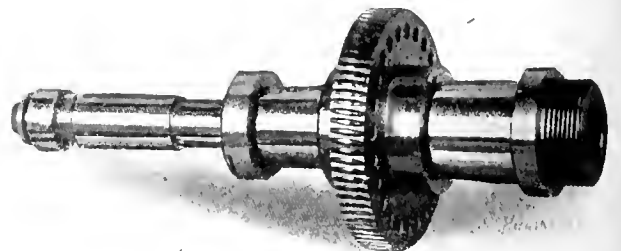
Dividing Head Spindle and Worm-wheel Assembled
